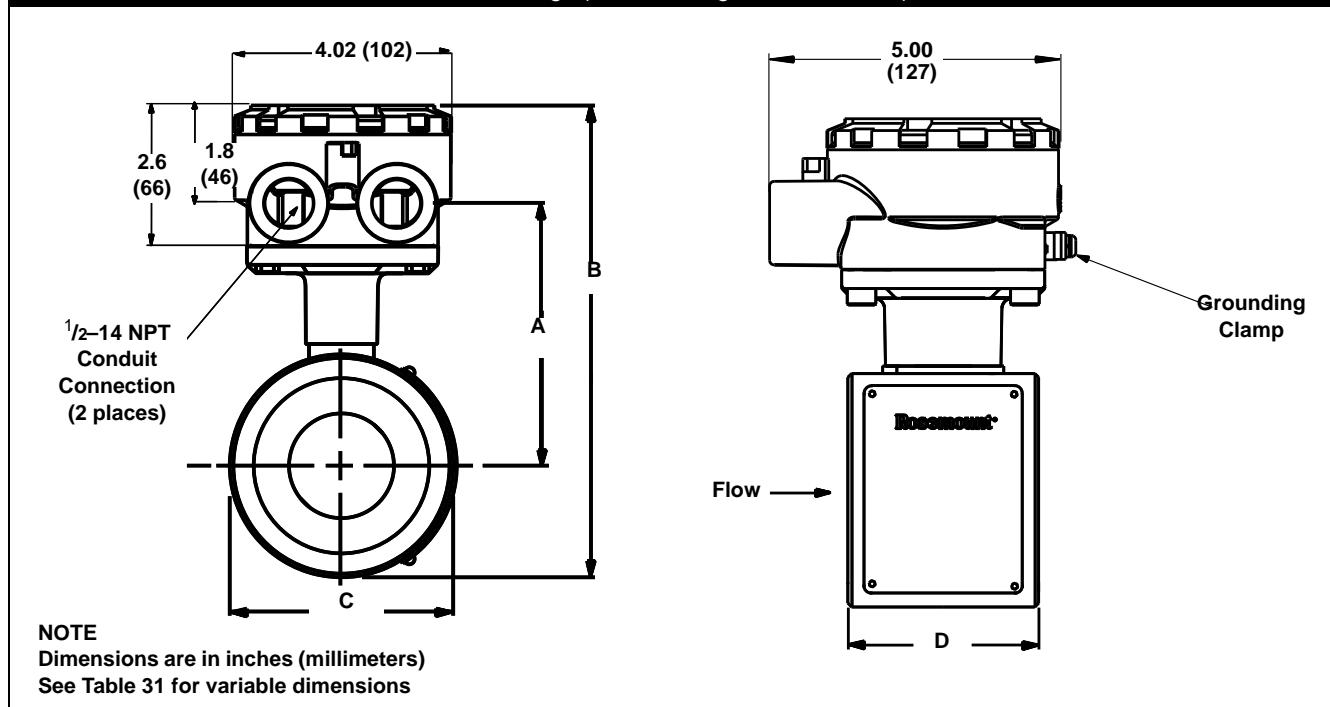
Rosemount 8711 Dimensional Drawings (1.5-in. through 8-in. line sizes)
